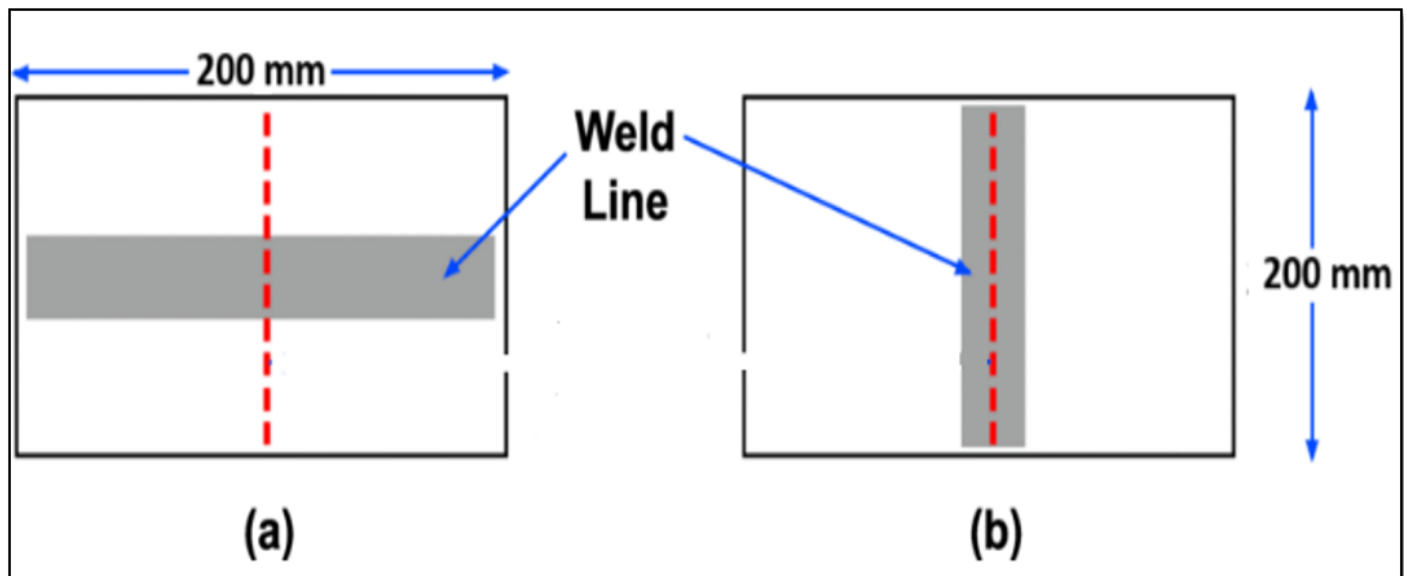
Welded Specimen (a) Perpendicular (b) Parallel [15]
